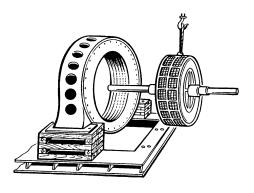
Driving the rotor into the stator mounted on a stack of sleepers
